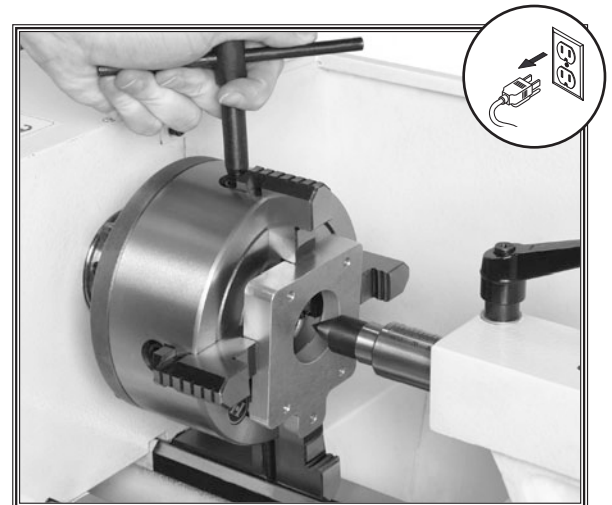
Rough centering procedure with a typical 4-jaw chuck, using the dead center and the tailstock.
